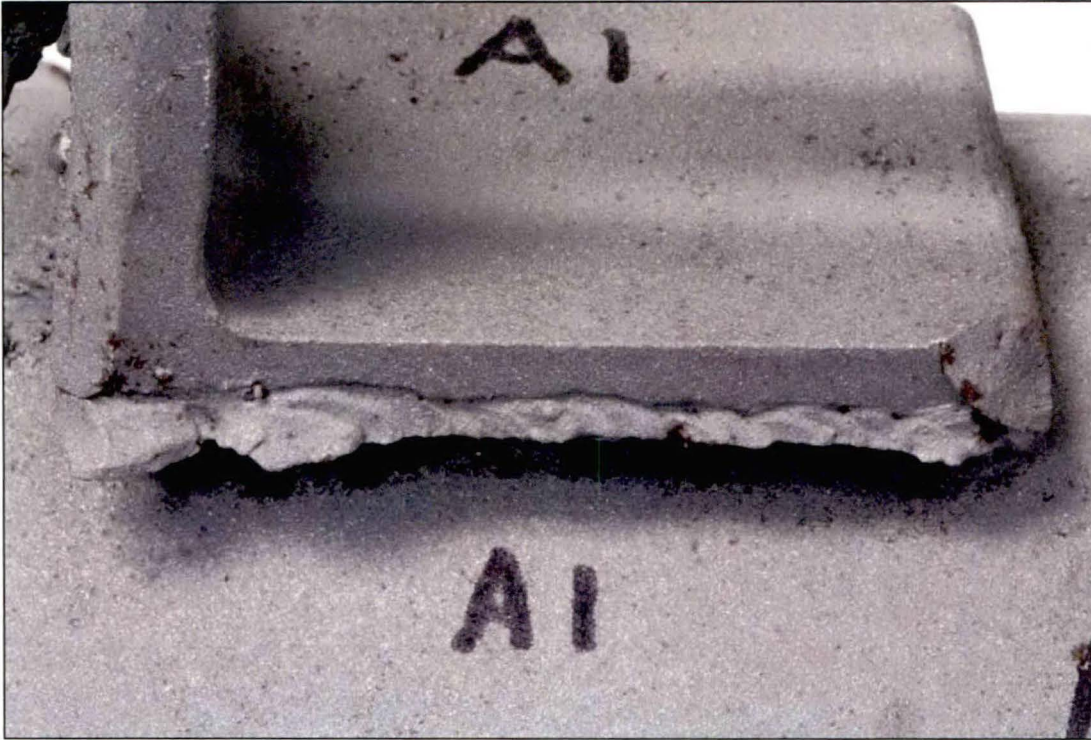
Image of the Lug A1 right side weld which was not fused. Due to the flat lug base configuration, one side of each lug was not properly welded.
